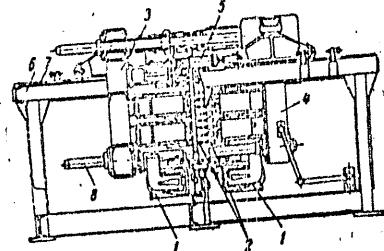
1 - welding transformers; 2 - welding guns; 3 and 4 - vertical plates; 5 - driving mechanism for plates; 6 - frame; 7 - guides; 8 - rods
